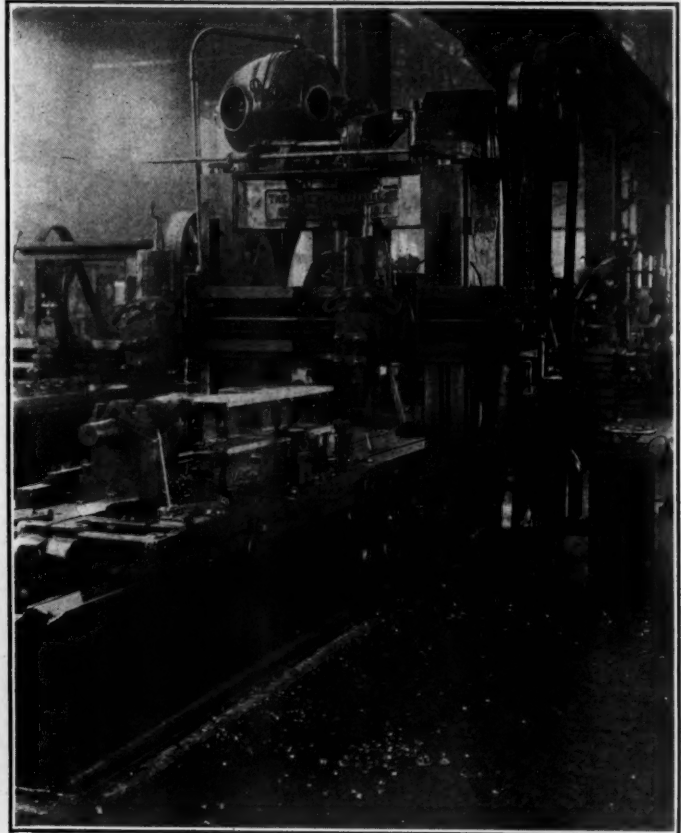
THE APPLICATION OF A VARIABLE-SPEED DRIVE TO THE 42-IN. CINCINNATI PLANER, WITH SPECIAL GEAR BOX GIVING CUTTING SPEEDS OF 15, 20, 25 AND 30 FT. PER MIN.
